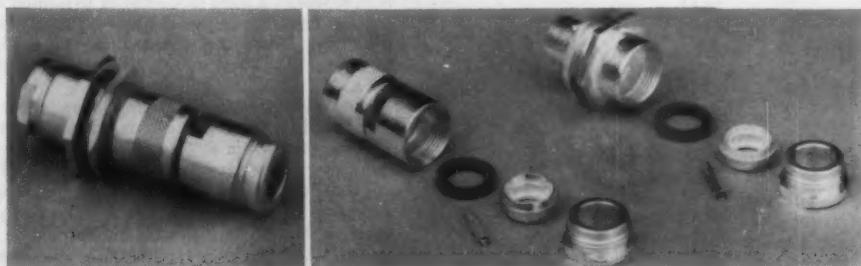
Drawing of the rotary joint made with coaxial connectors.
